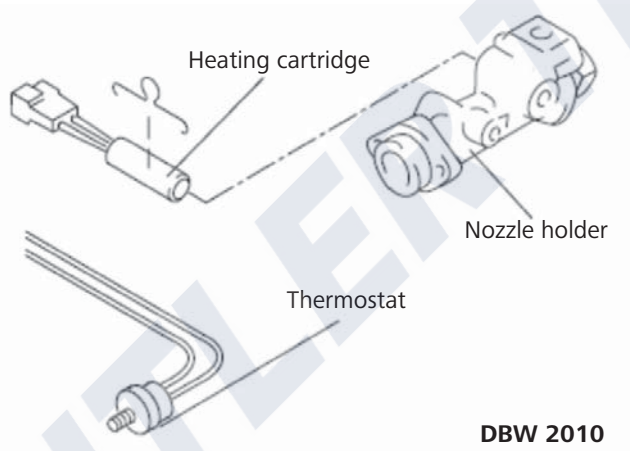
Installing nozzle holder pre-heating unit with 1563/1564 control unit
